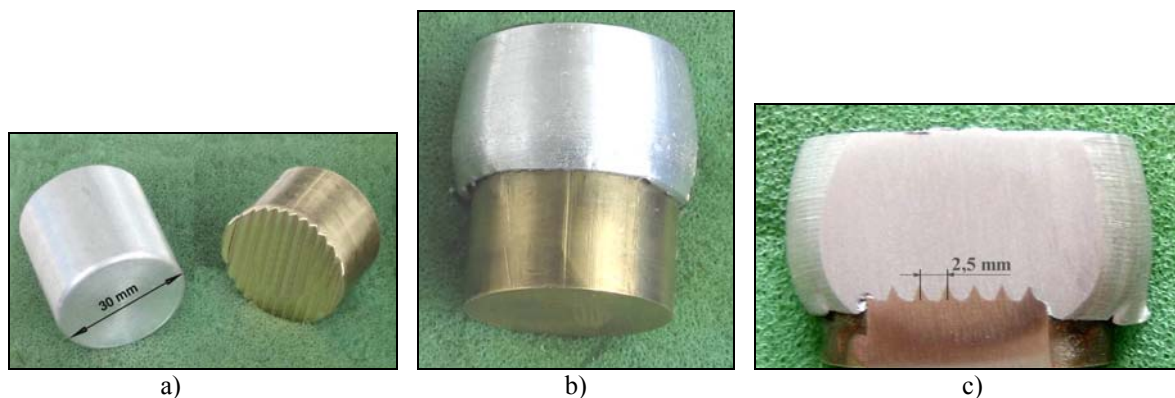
Specimens' components: a) before up-setting; b) welded specimen; c) the brass cogs imprint the aluminium.
